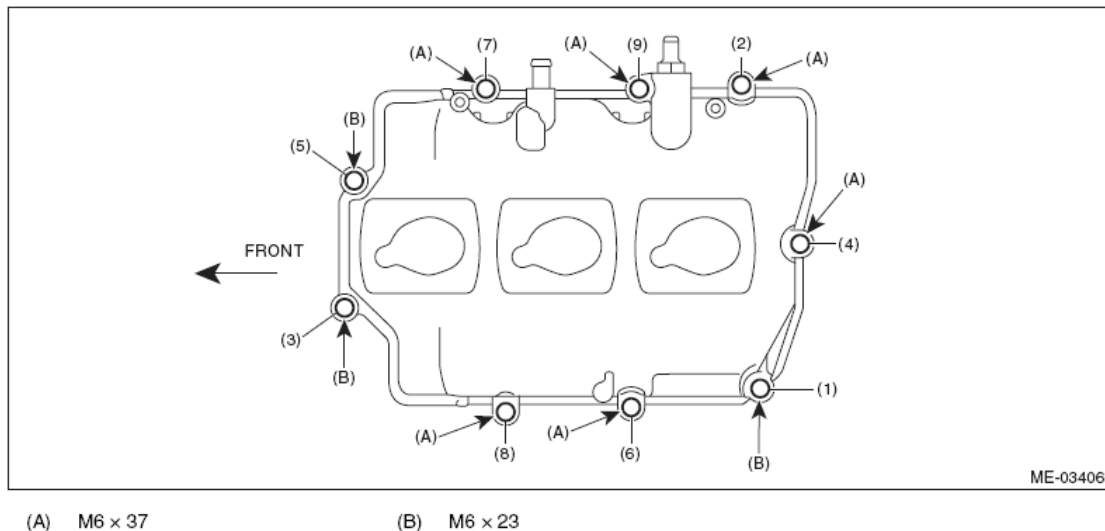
Identifying Camshaft Mounting Bolt (LH Side)
